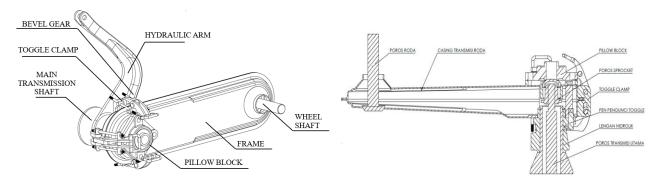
(a) Design construction of modular wheel transmission, and (b) Design structure of shaft sprocket wheel transmission
